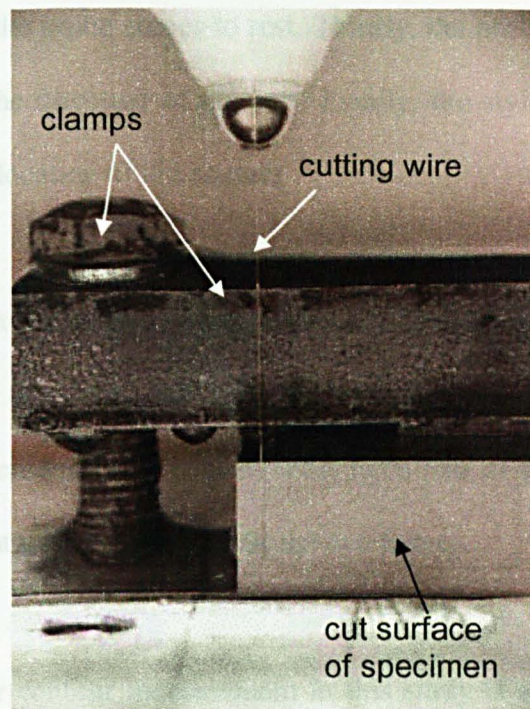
Closer view of clamps and cut surface, in which half the cut piece was removed from the front for clearer view.
